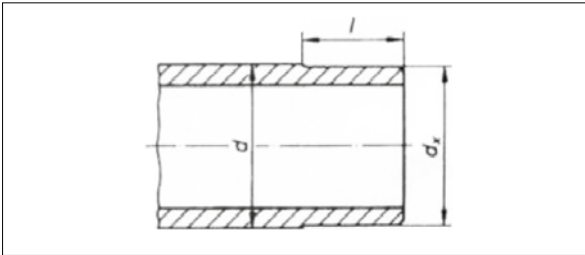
For the socket welding prepared pipe end (dimensions see table)
